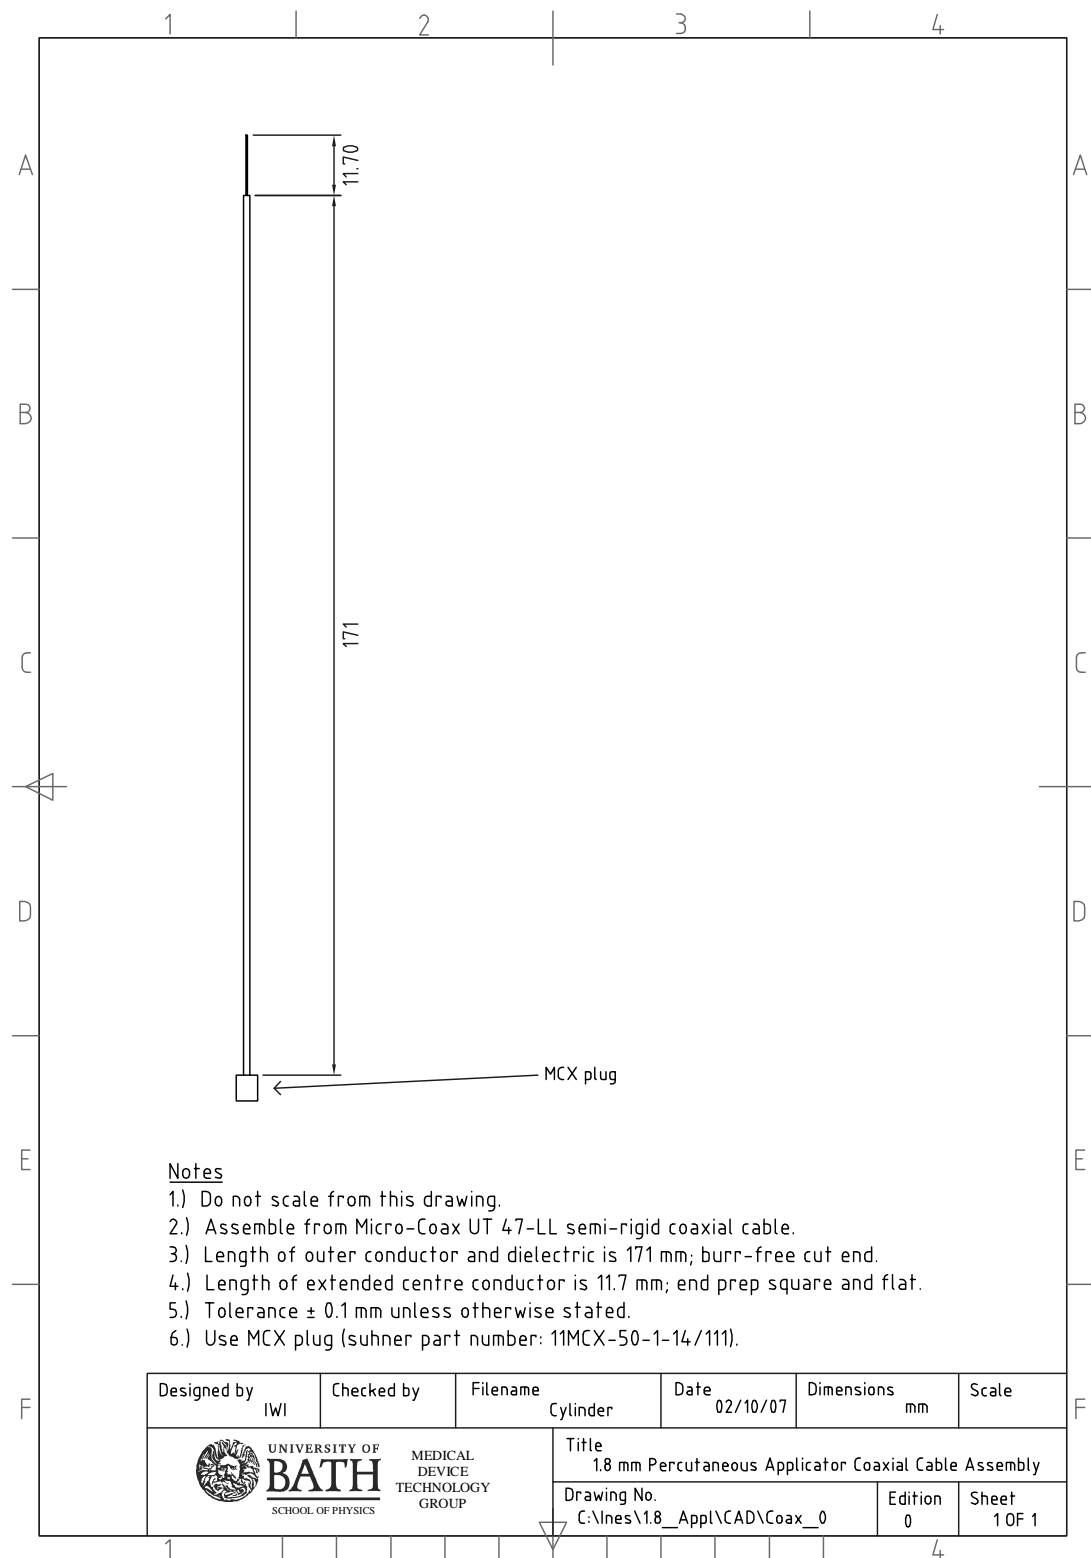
Drawing of customised semi-rigid coaxial cable for first applicator manufacture.
